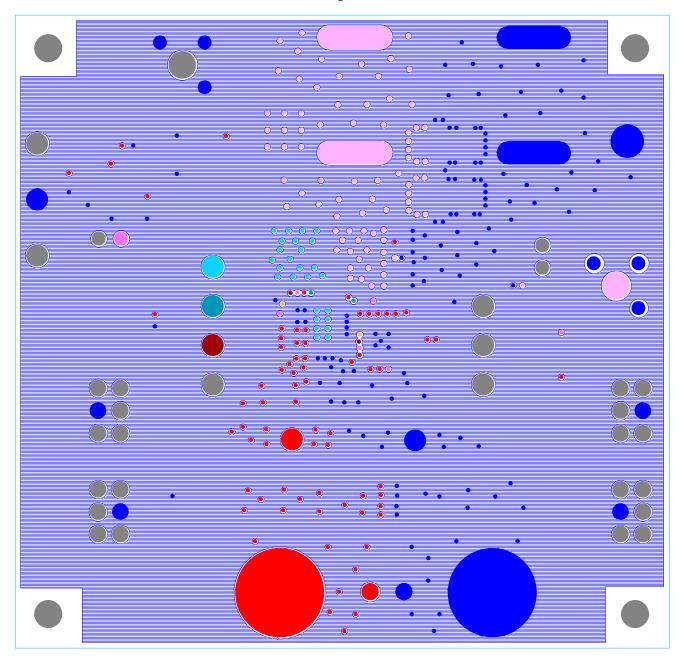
PCB - INNER LAYER 2 (TOP VIEW)
